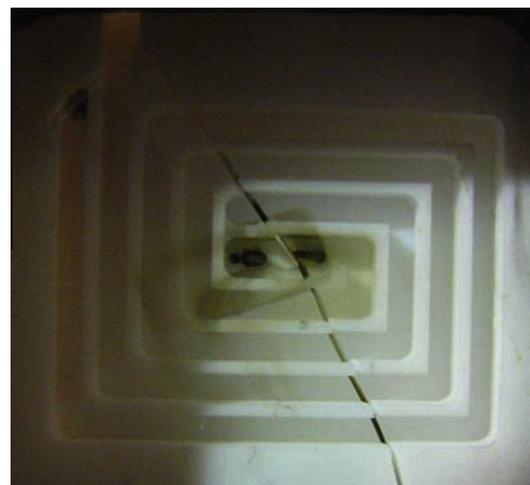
Macor combustor that has fractured due to acoustic interactions between the flame and the combustor.
